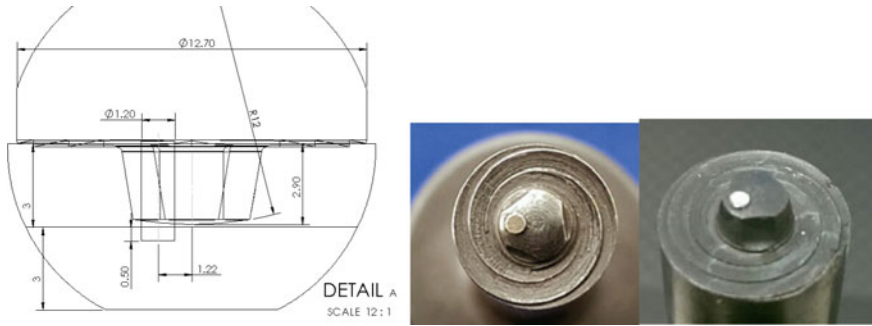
Left* Drawing of the FSW tool with scribe insert. *Right* Picture of two scribe tools (W–C–Co) used for welding 1 mm thick AA6022 to 3 mm thick cast aluminum
